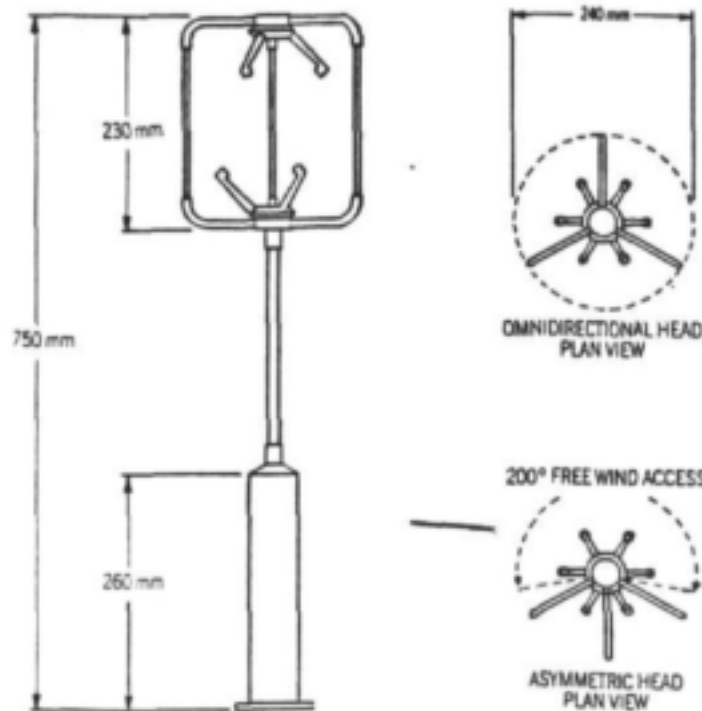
Gill ultrasonic anemometer with transducers (top) and cylindrical housing (below).
